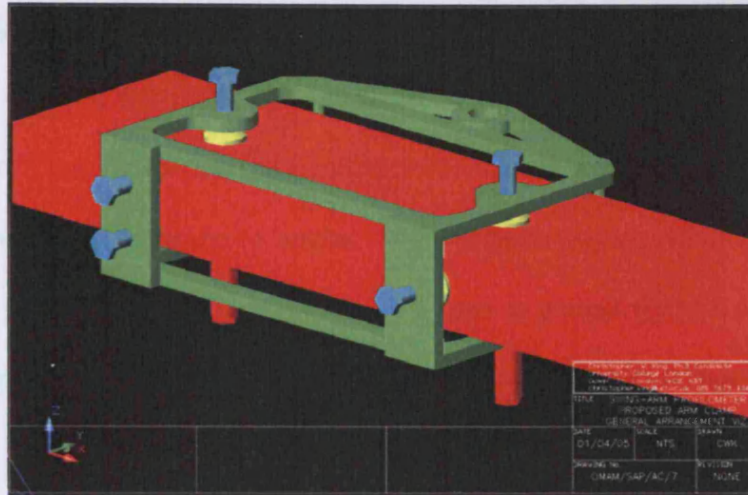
Conceptual design of an arm clamp, used to alter the mechanical arm length (design and CAD drawing produced by C W King)
